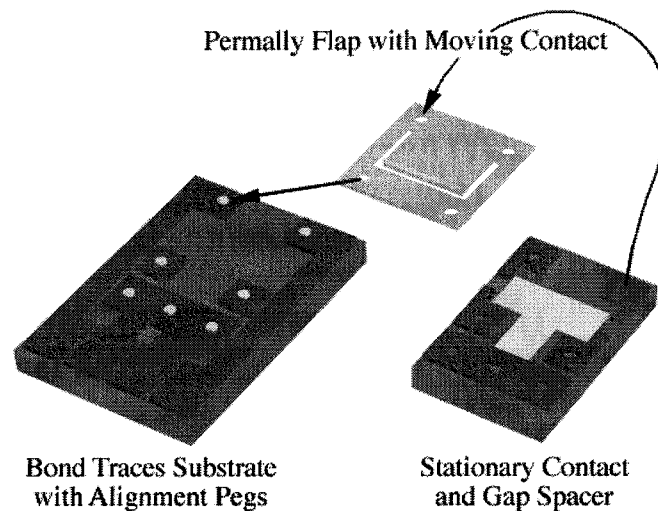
Drawings of the pieces fabricated and assembled to produce the three-substrate microrelay. To the left is the bond traces piece, in the center is the permalloy plate with integrated contact strip, and to the right is the final piece containing the stationary contact and the spacer pedestals which define the contact gap. Note how the bond traces substrate has 7 plated alignment pegs on its structures with the other two pieces containing alignment holes that fit down over these points making assembly quick, reliable, and accurate.
